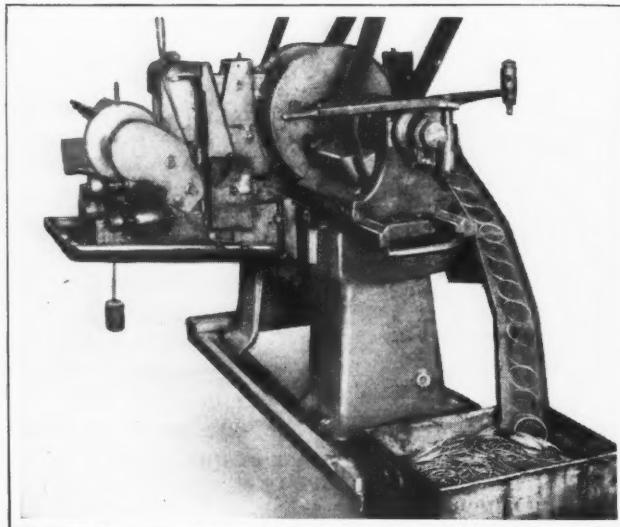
Besly Disk Grinder for Finishing Piston-rings
